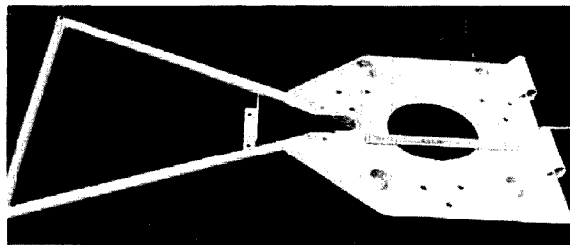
Lower hinge plate, made of 23/64-inch (9-mm) thick steel. The triangular outrigger is fabricated of 1-inch (25 mm) diameter steel tubing. The angle iron bracket secures the gin pole that is held in place in the half circular cutout. The central hole helps reduce the weight (64 pounds/29 kg).
